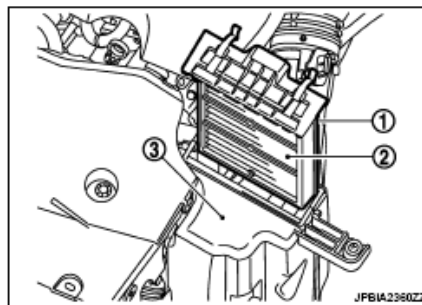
Identifying Air Cleaner Filter And Air Cleaner Case
